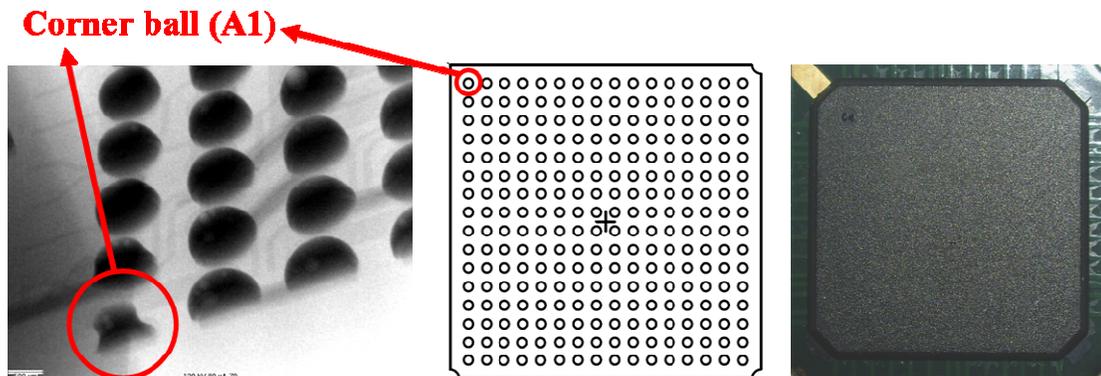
Location of corner ball with hourglass-shaped joint in Sn based finish SAC305 solder (control sample)
